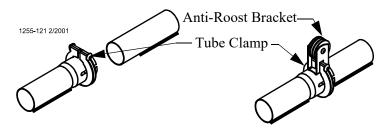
Tube Clamp and Tube Clamp with Anti-Roost Bracket
